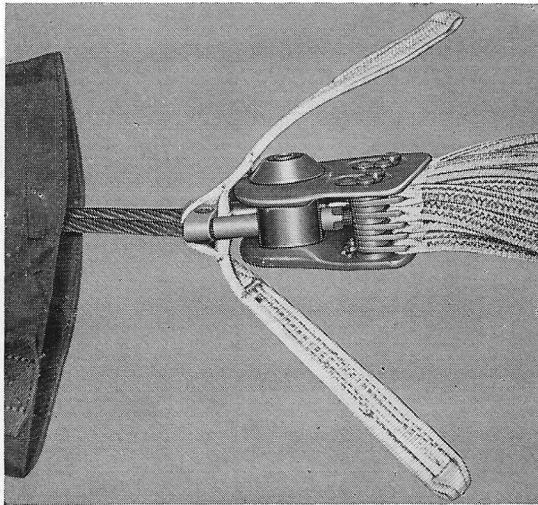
Cable assembly passed through gaiter and assembled to parachute connector
